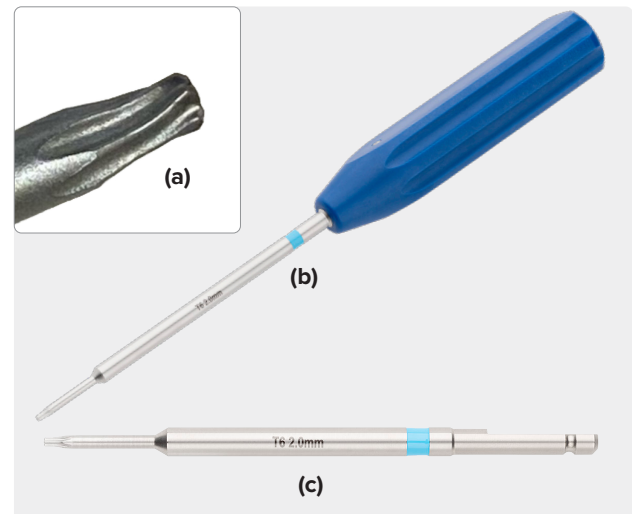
Deformed driver tip (a), T6 screwdriver (b) and T6 driver (c)
